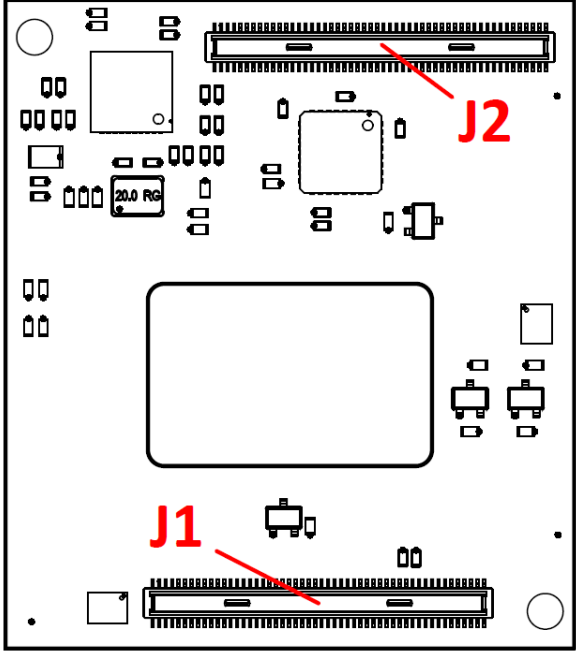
ADP-OSM-BB Connector Layout (Bottom View)
